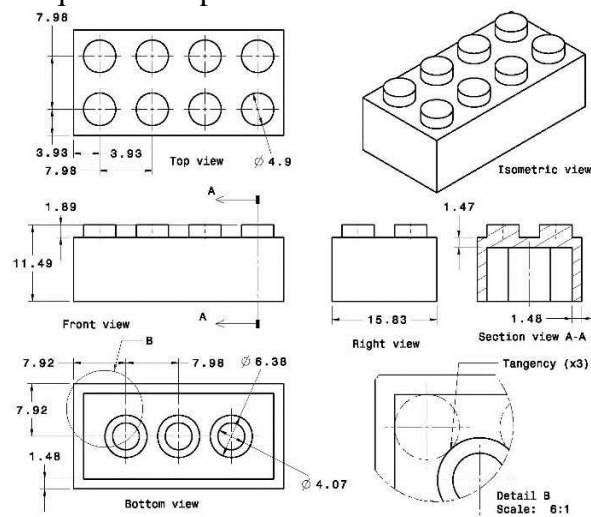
Dimensional Guidelines for LEGO® Stud Mechanism to mate with FDM Built Parts
